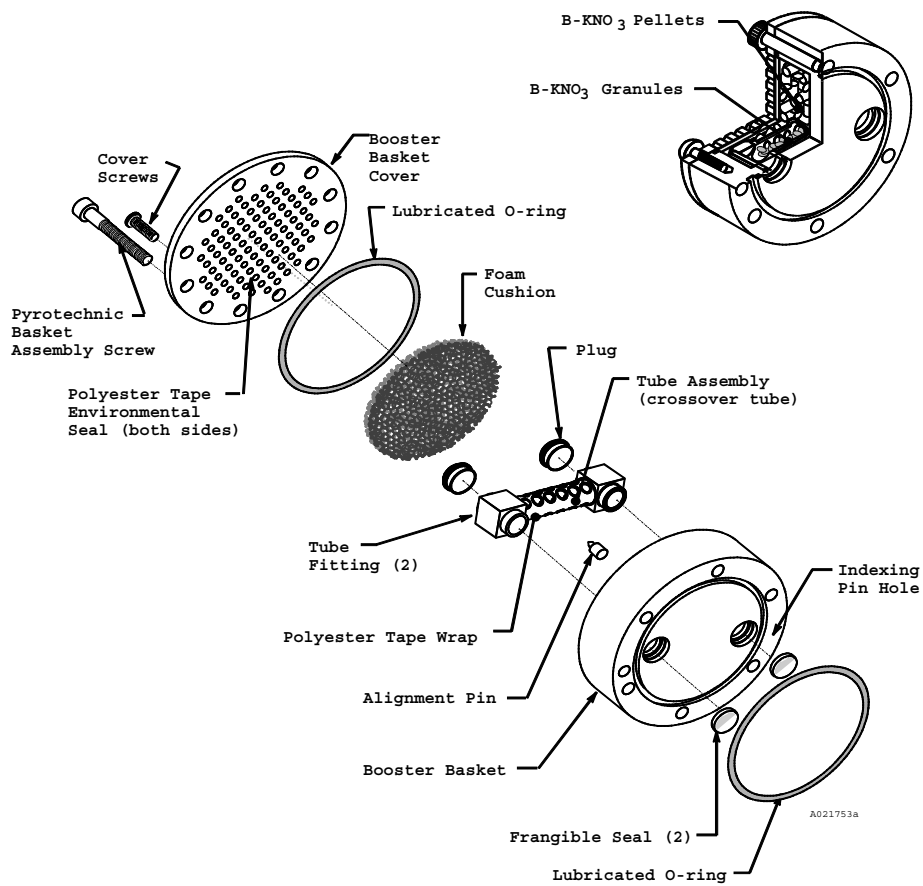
Pyrotechnic-Basket Assembly Section and Exploded Views
